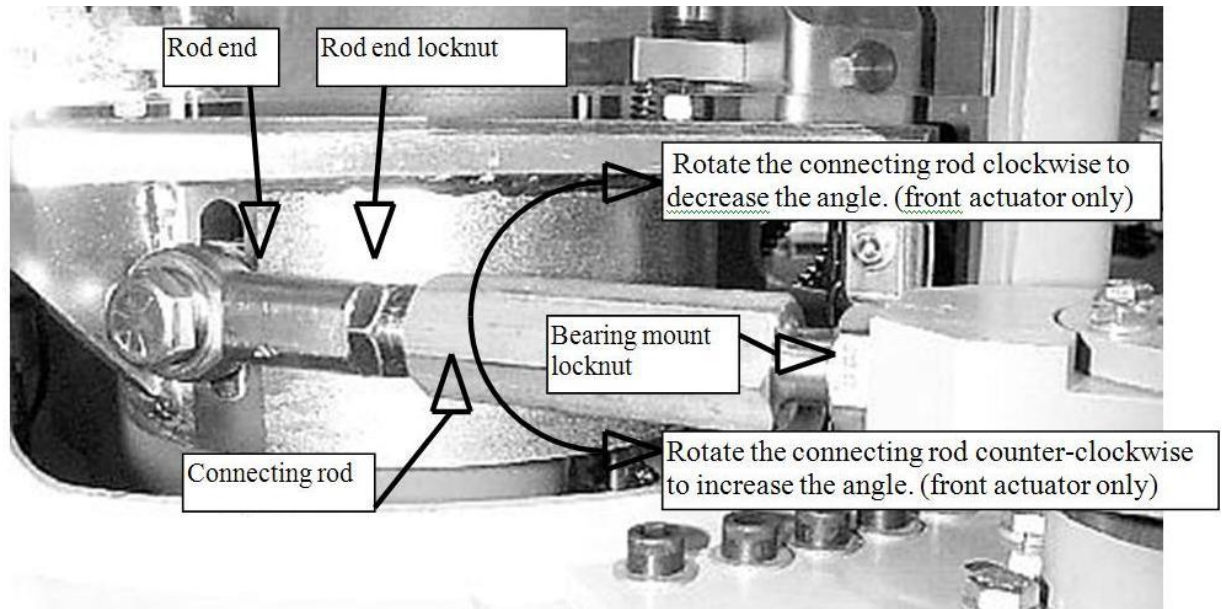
Front Actuator Connecting Rod Length Adjustment
